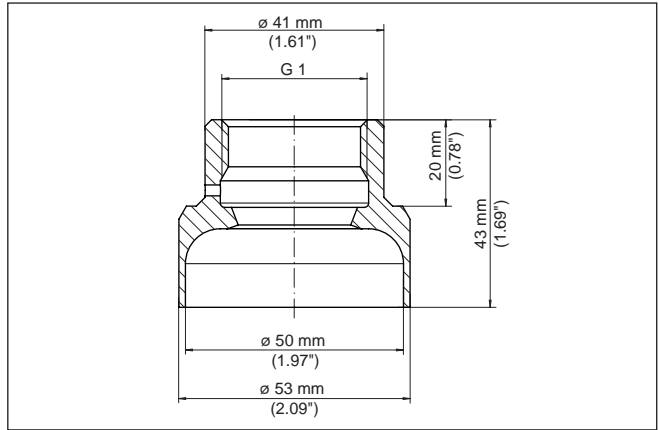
Dimensions direct welded socket for pipe mounting G1 - Cone sealing
